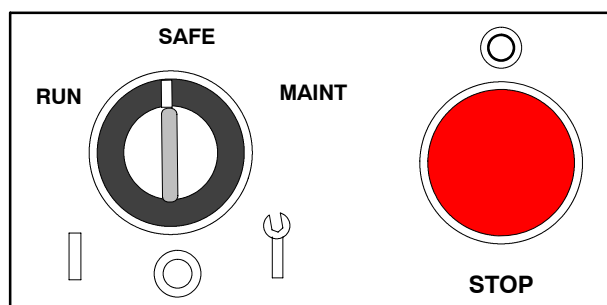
Know How to Stop Machine & Set Key Switch to SAFE
